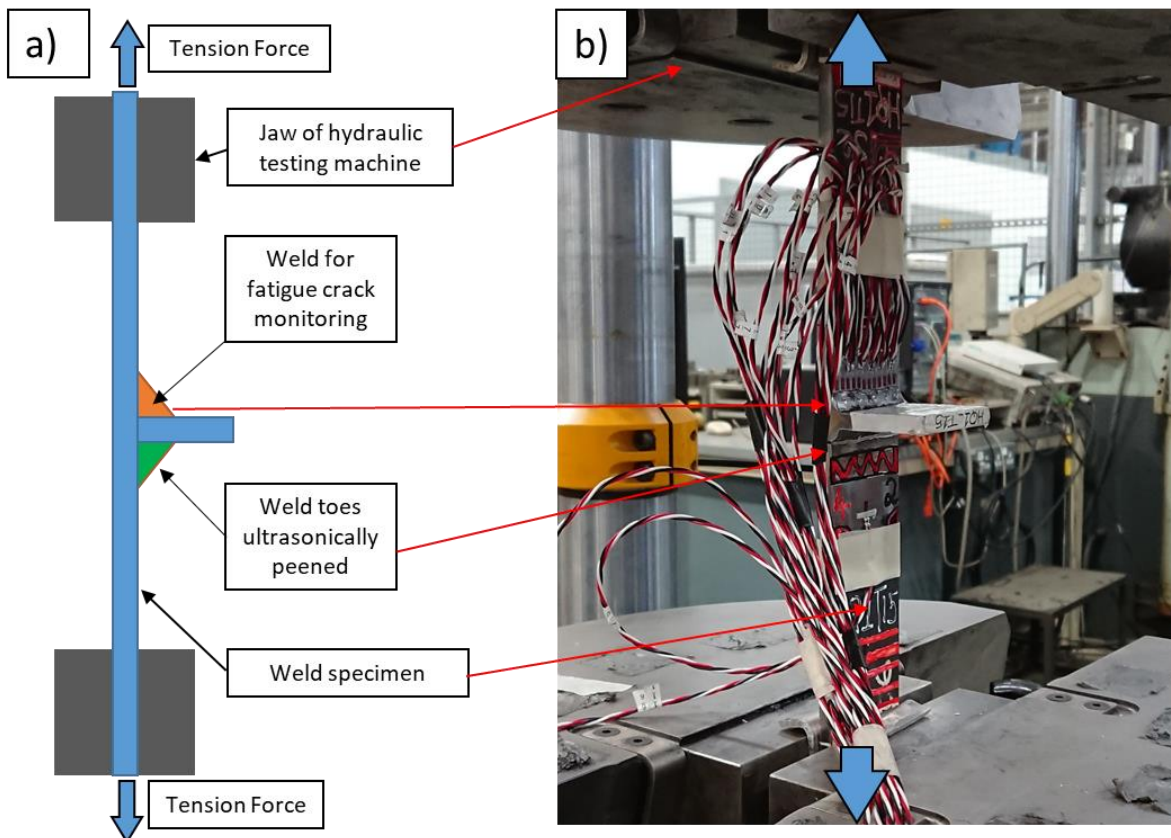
a) Schematic of specimen setup in fatigue testing machine; b) actual photograph of specimen gripped in the testing machine.
